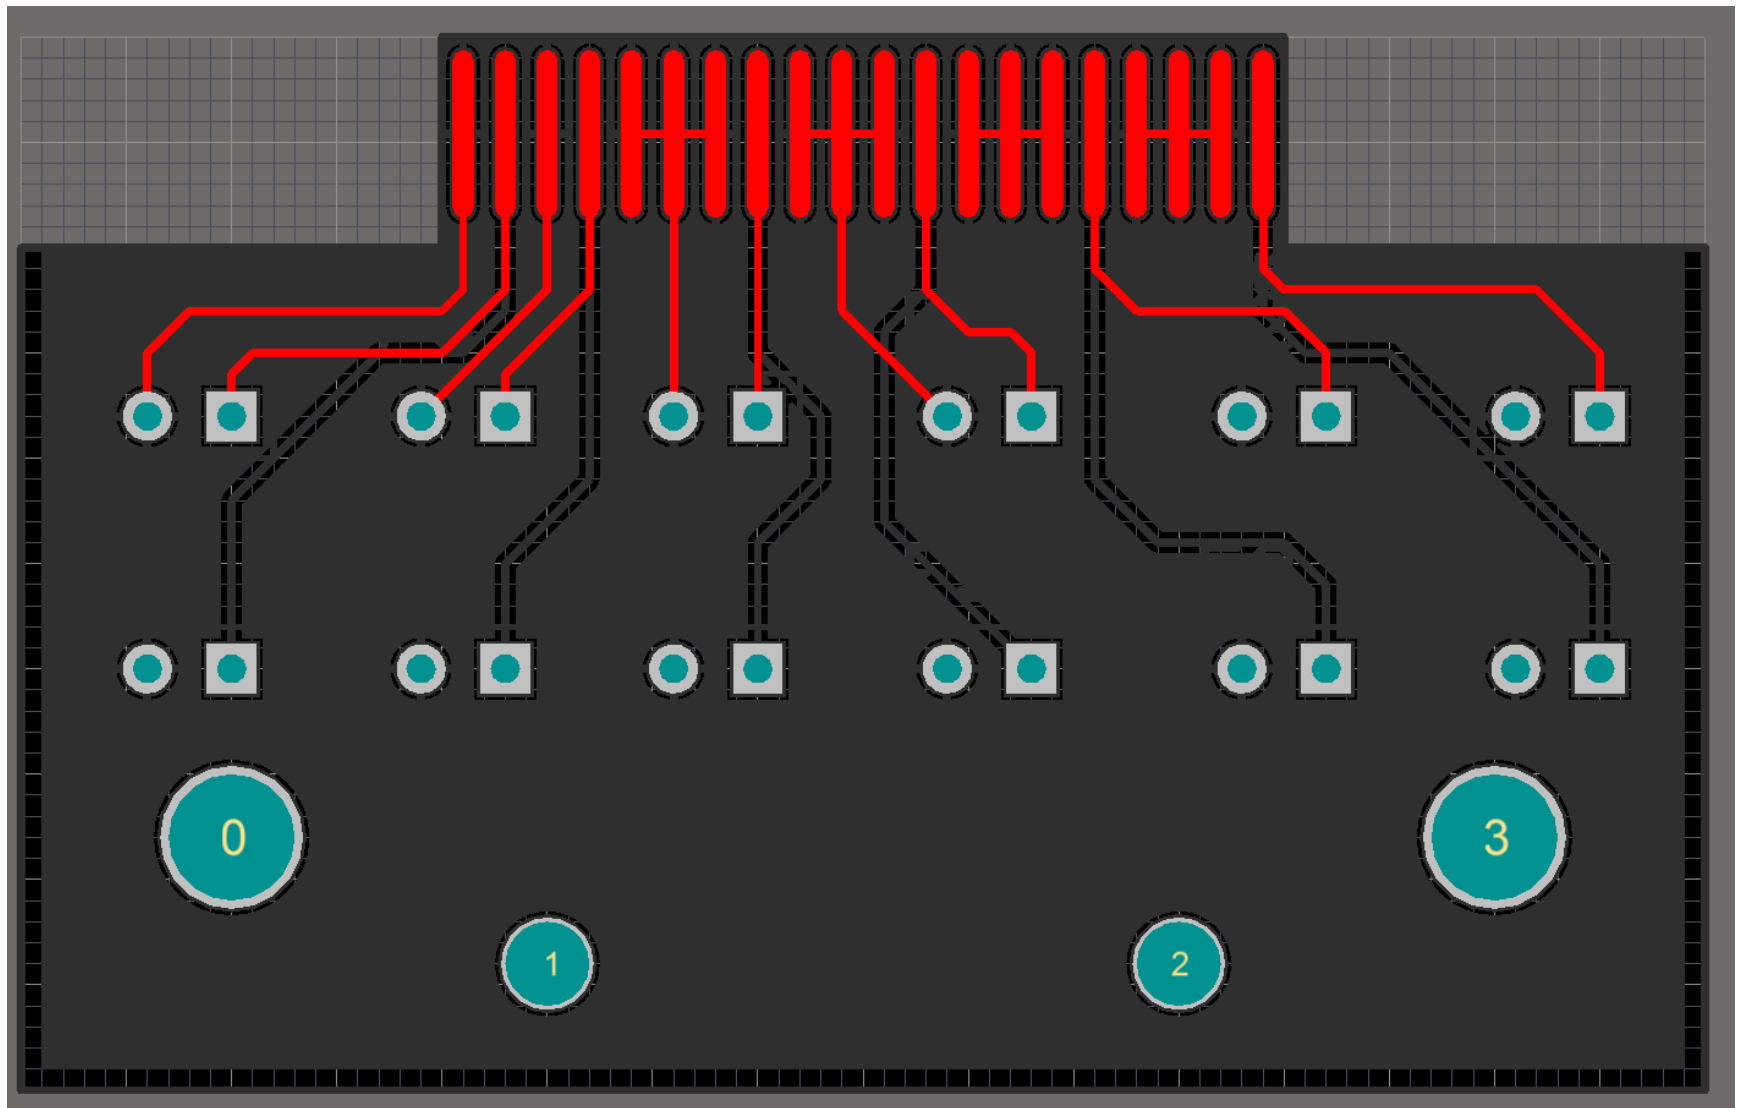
Sensor Board PCB, Altium Front View (Flex and Pressure sensor connection section)
